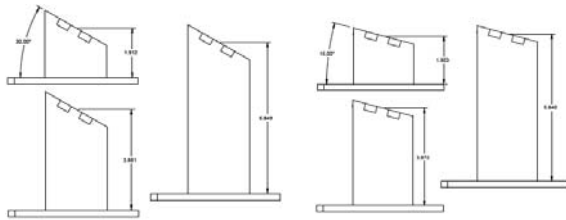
CAD drawing of the GT2012 high-tilt (left) and low-tilt (right) mechanical offsets for three different heights specifications. Not shown is a no-tilt offset option.
